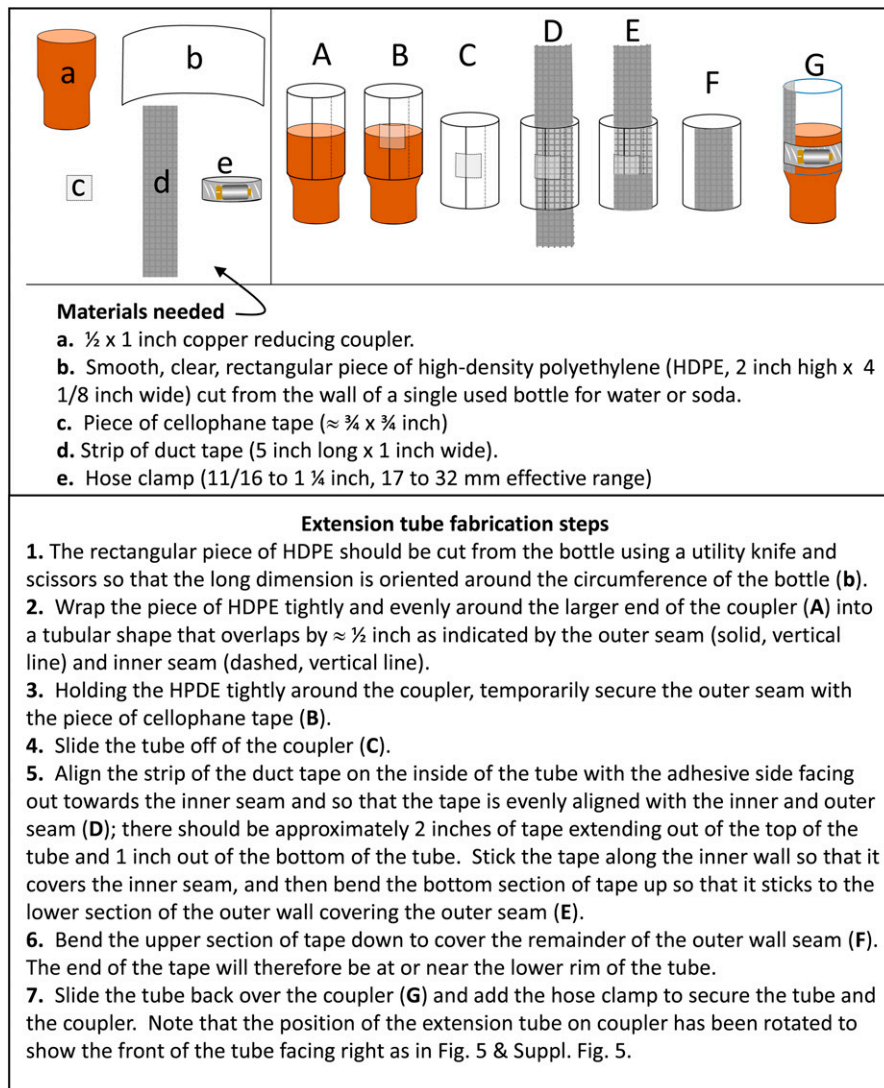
Materials needed and steps for fabricating the extension tube that holds the seed vial on top of the seeder shoe tube; 1 inch = 25.4 mm. See Supplemental Fig. 3 for enlarged, color version.
